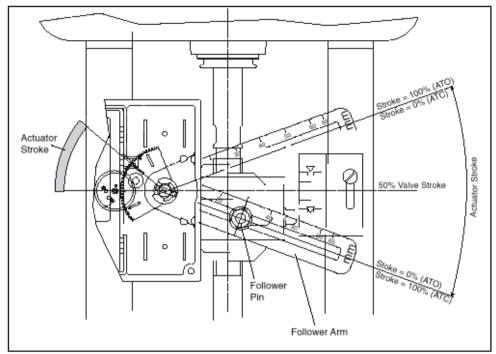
Basic Adjustment for a Linear Pneumatic Actuator
